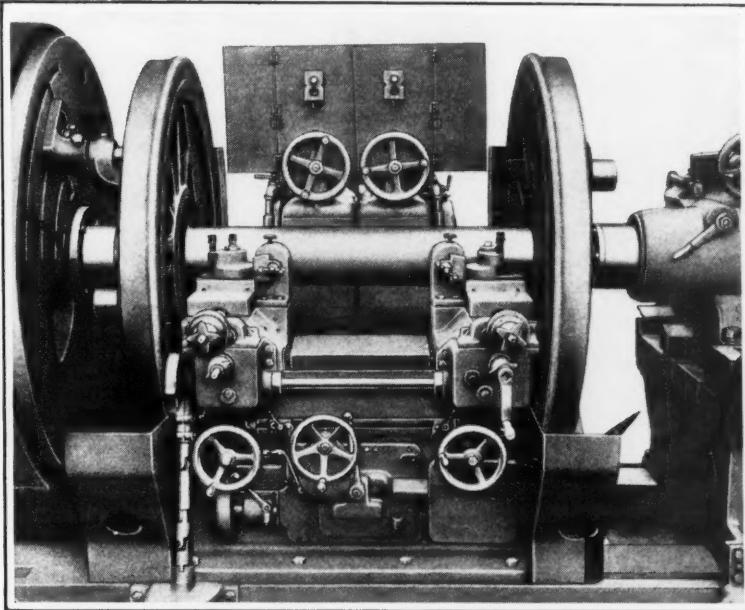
Close-up View of Machine with Driving-wheel Set in Place
